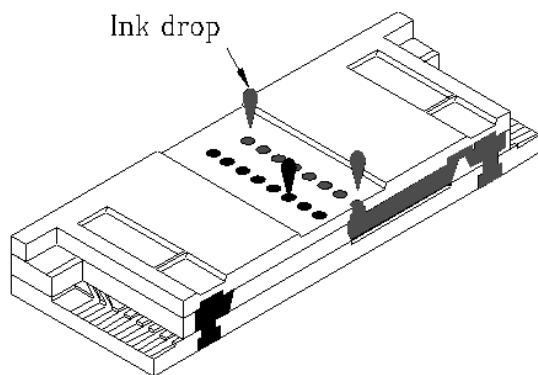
Perspective and partially cross sectional view of assembled SEA inkjet head chip
